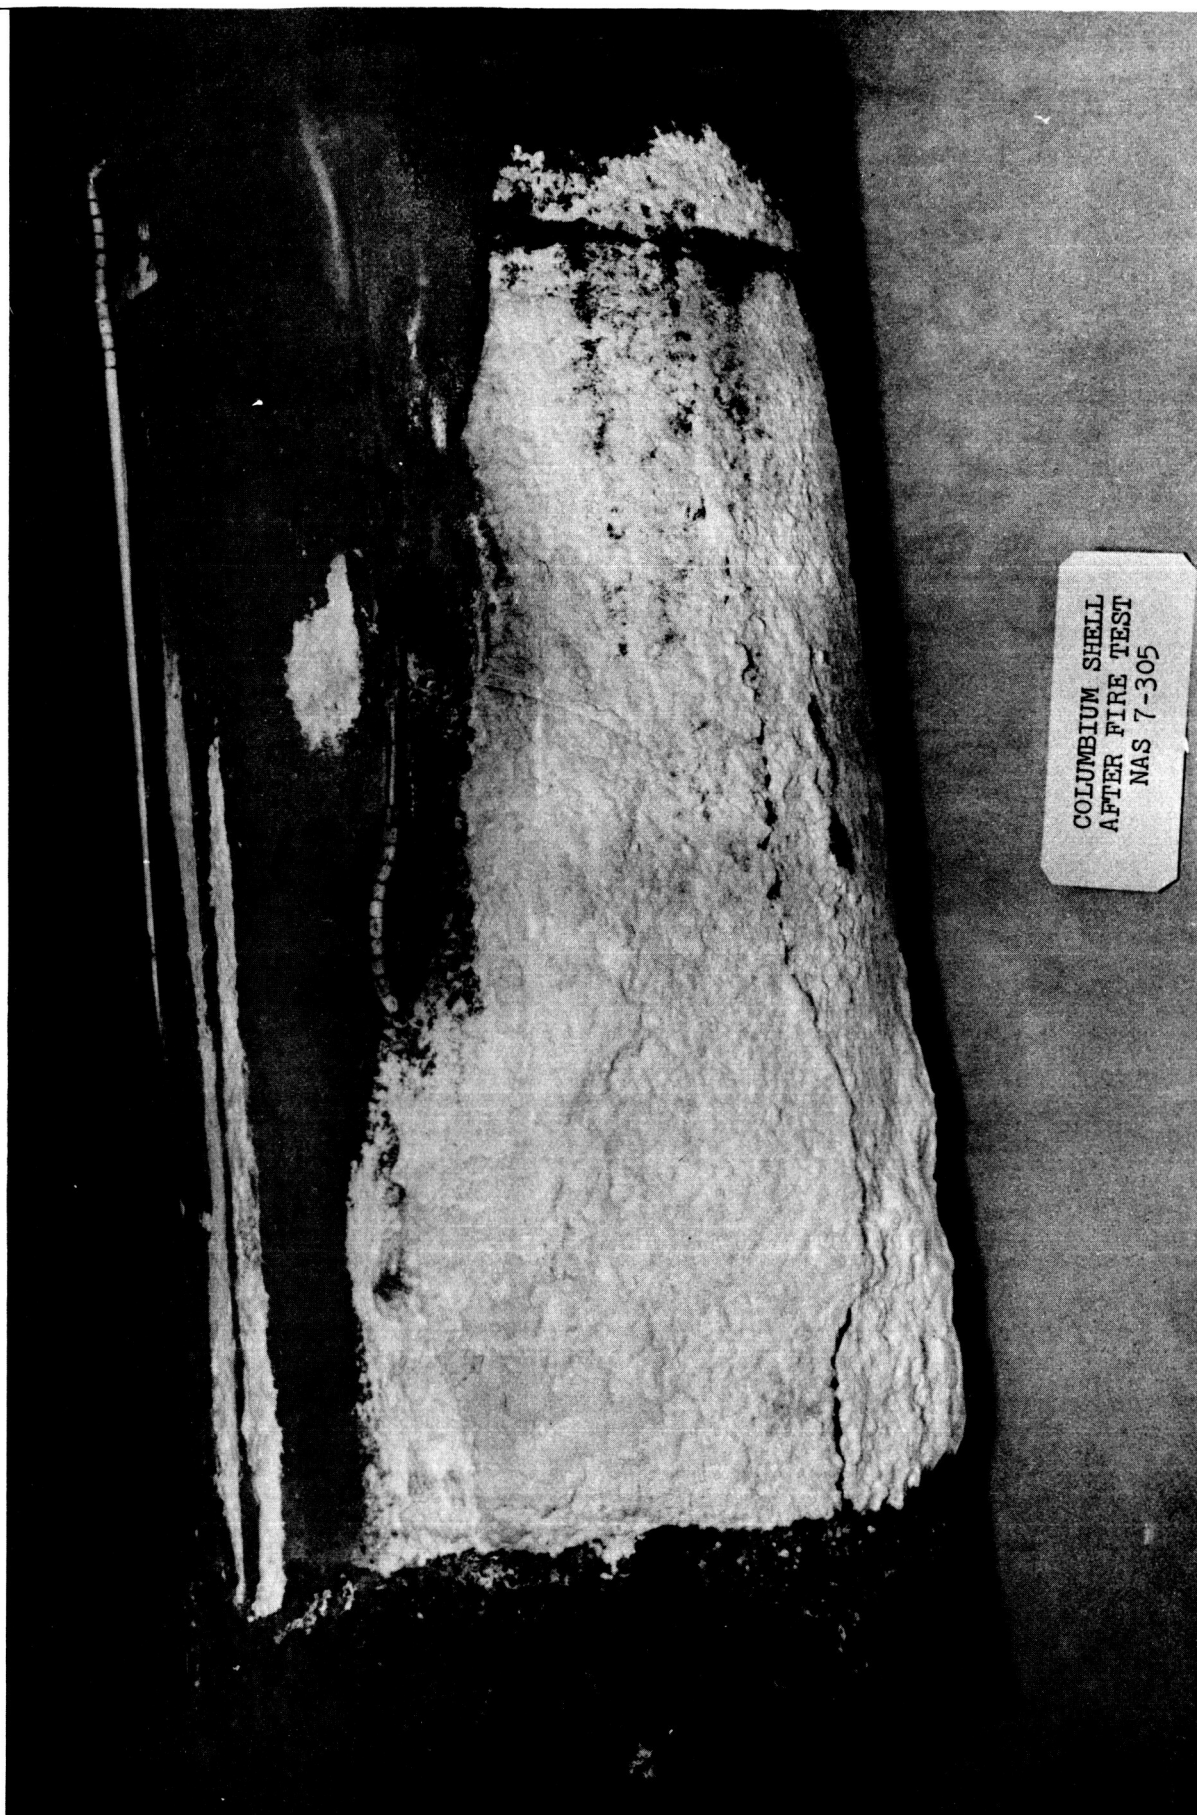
ColumbiuM Shell From Engine Assembly S/N 2 After Fire Test
